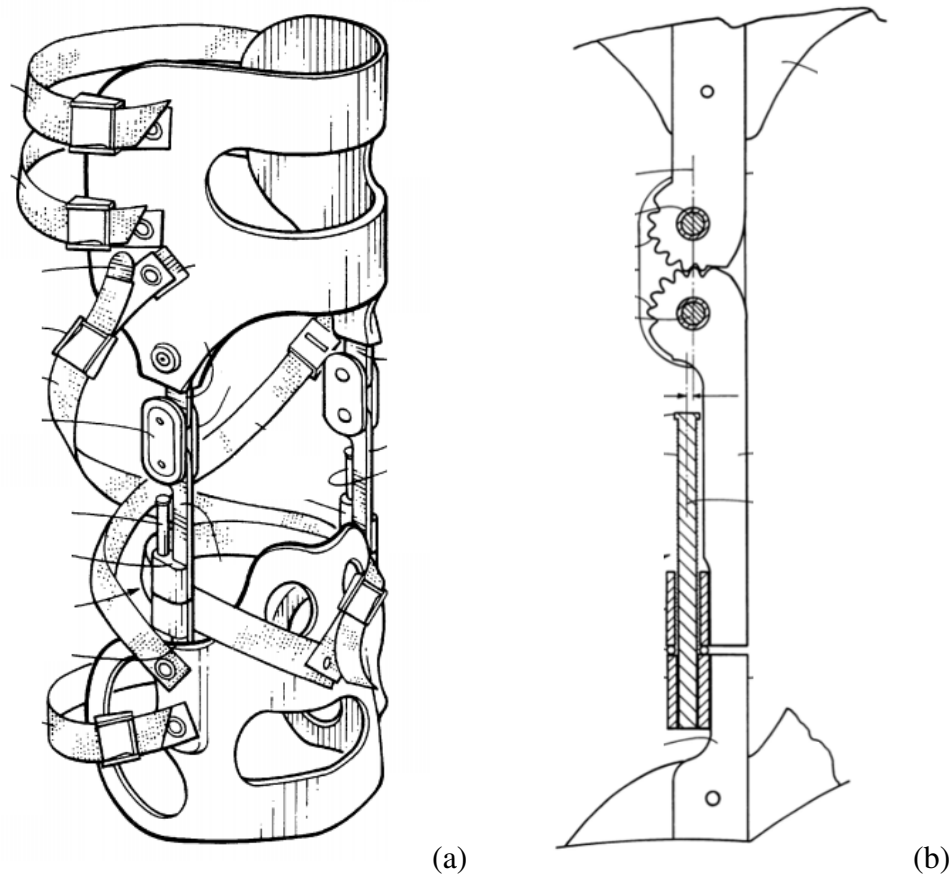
Double-hinge gear joint orthosis [45]. (a) Complete orthosis, (b) cap removed to show gears. Labels removed for clarity.
